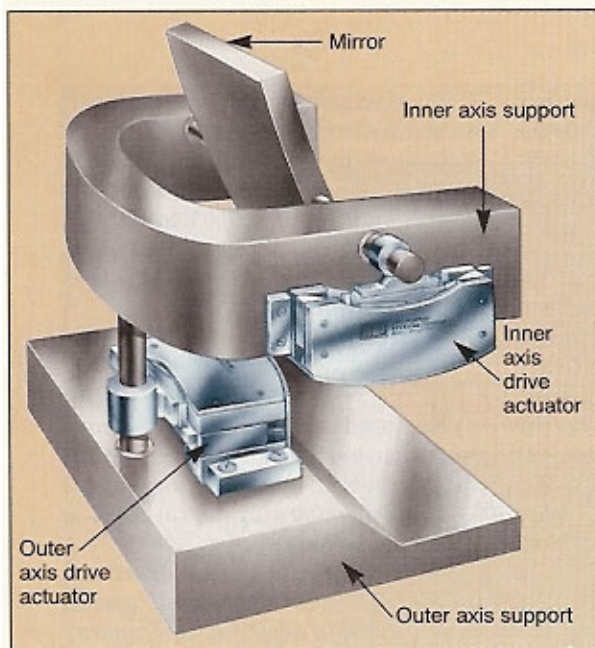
Gimbal assembly showing two rotary voice coil actuators. The inner axis drive actuator turns the mirror. The outer axis drive actuator turns the mirror assembly.
